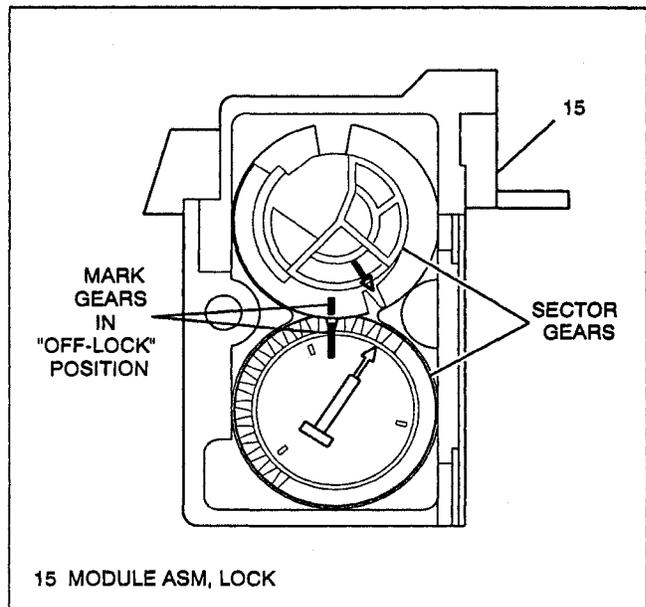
Sector Gear Timing Position (OFF-LOCK)
